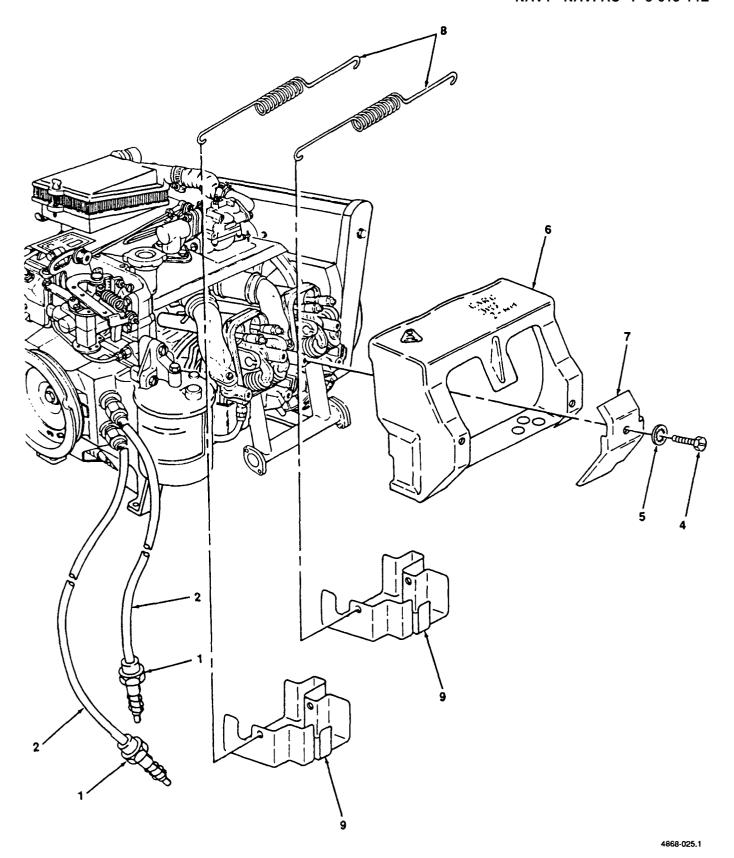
Cylinder Head Cover, Internal Cover, and Baffles, Removal.
